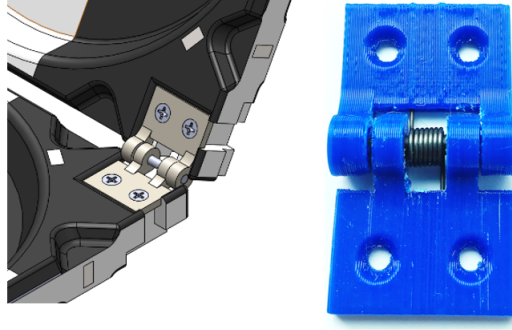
The torsion spring hinges uses screws to fix on the bricks. The hinge is printed on a low-end 3D printer. The rotational axle is an aluminum rod. The torsion spring legs fit into plastic hinges through two holes; these two holes are also 3D printed with hinge bodies.
